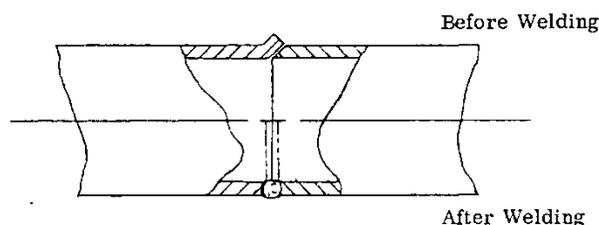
FLARE-BEVEL BUTT-WELD JOINT
